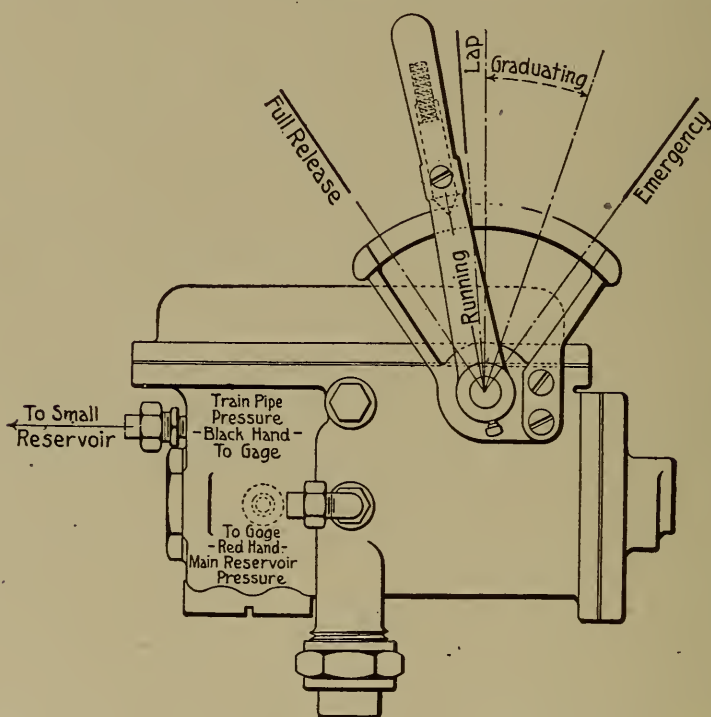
Side View of New York Engineer's Brake-Valve, Showing Different Positions of Handle.
